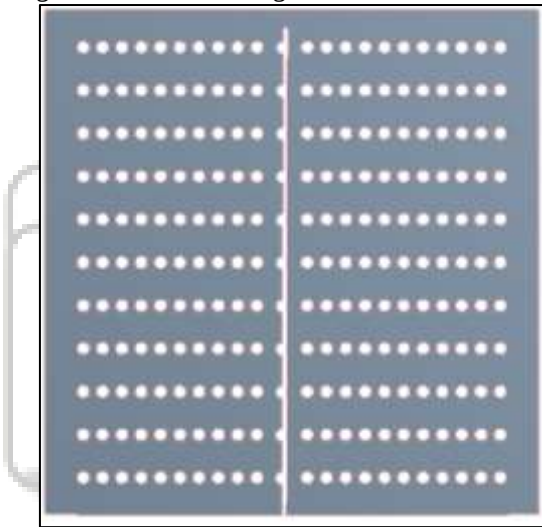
CAD model of absorber plate of evacuated flat plate collector design-3
